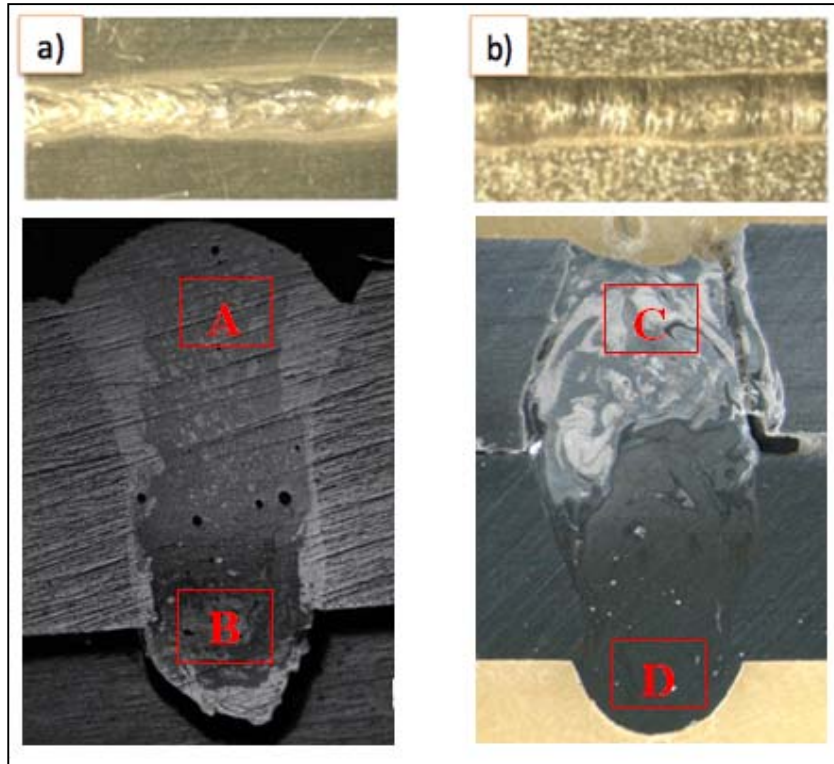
Optical macrographs of cross-section of dissimilar welds, (a) A5754 on the top, (b) AZ31 on the top.
